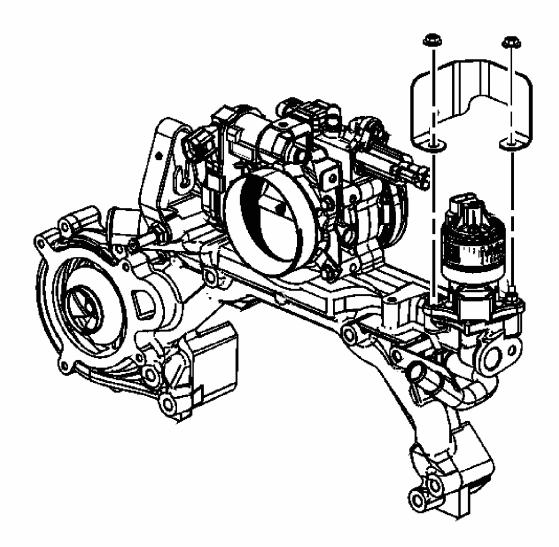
Identifying EGR Bracket Shield Nuts Courtesy of GENERAL MOTORS CORP.
